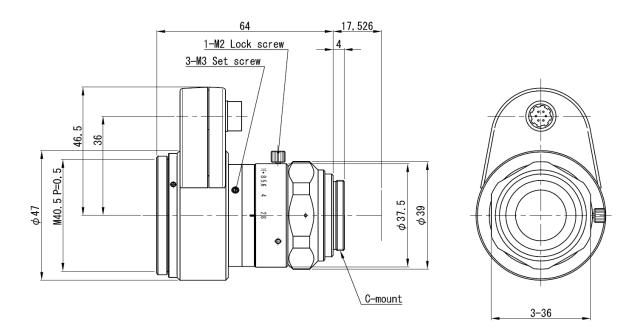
Mechanical drawing of the ELM-12-2.8-18-C
